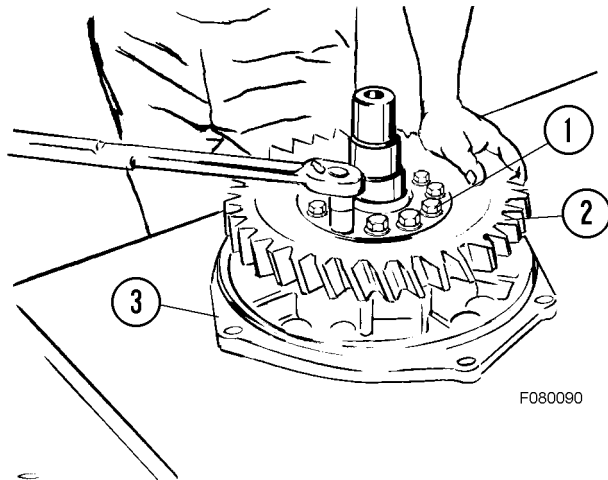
PUMP DRIVE GEAR INSTALLATION
